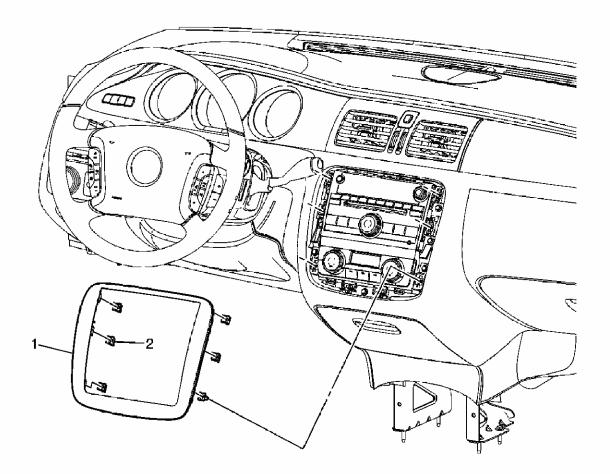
Locating Instrument Panel Center Trim Panel Courtesy of GENERAL MOTORS CORP.
